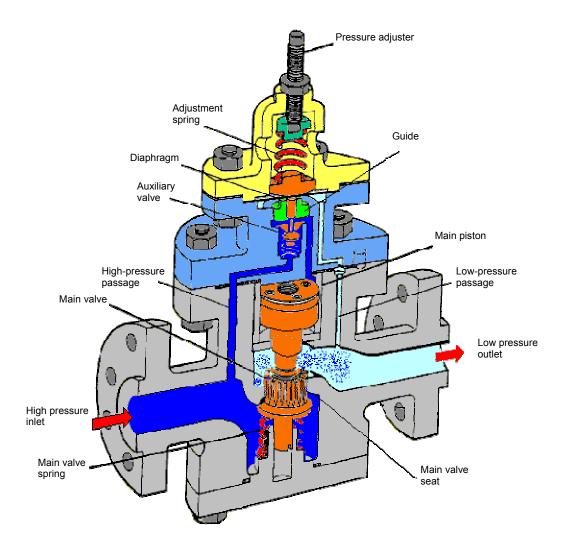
Adjustable Steam Pressure Reducing Valve
